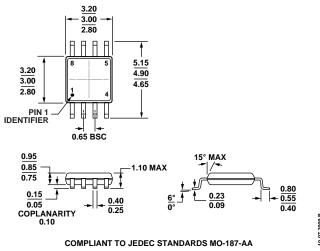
8-Lead mini Small Outline Package [MSOP] (RM-8) Dimensions shown in millimeters
